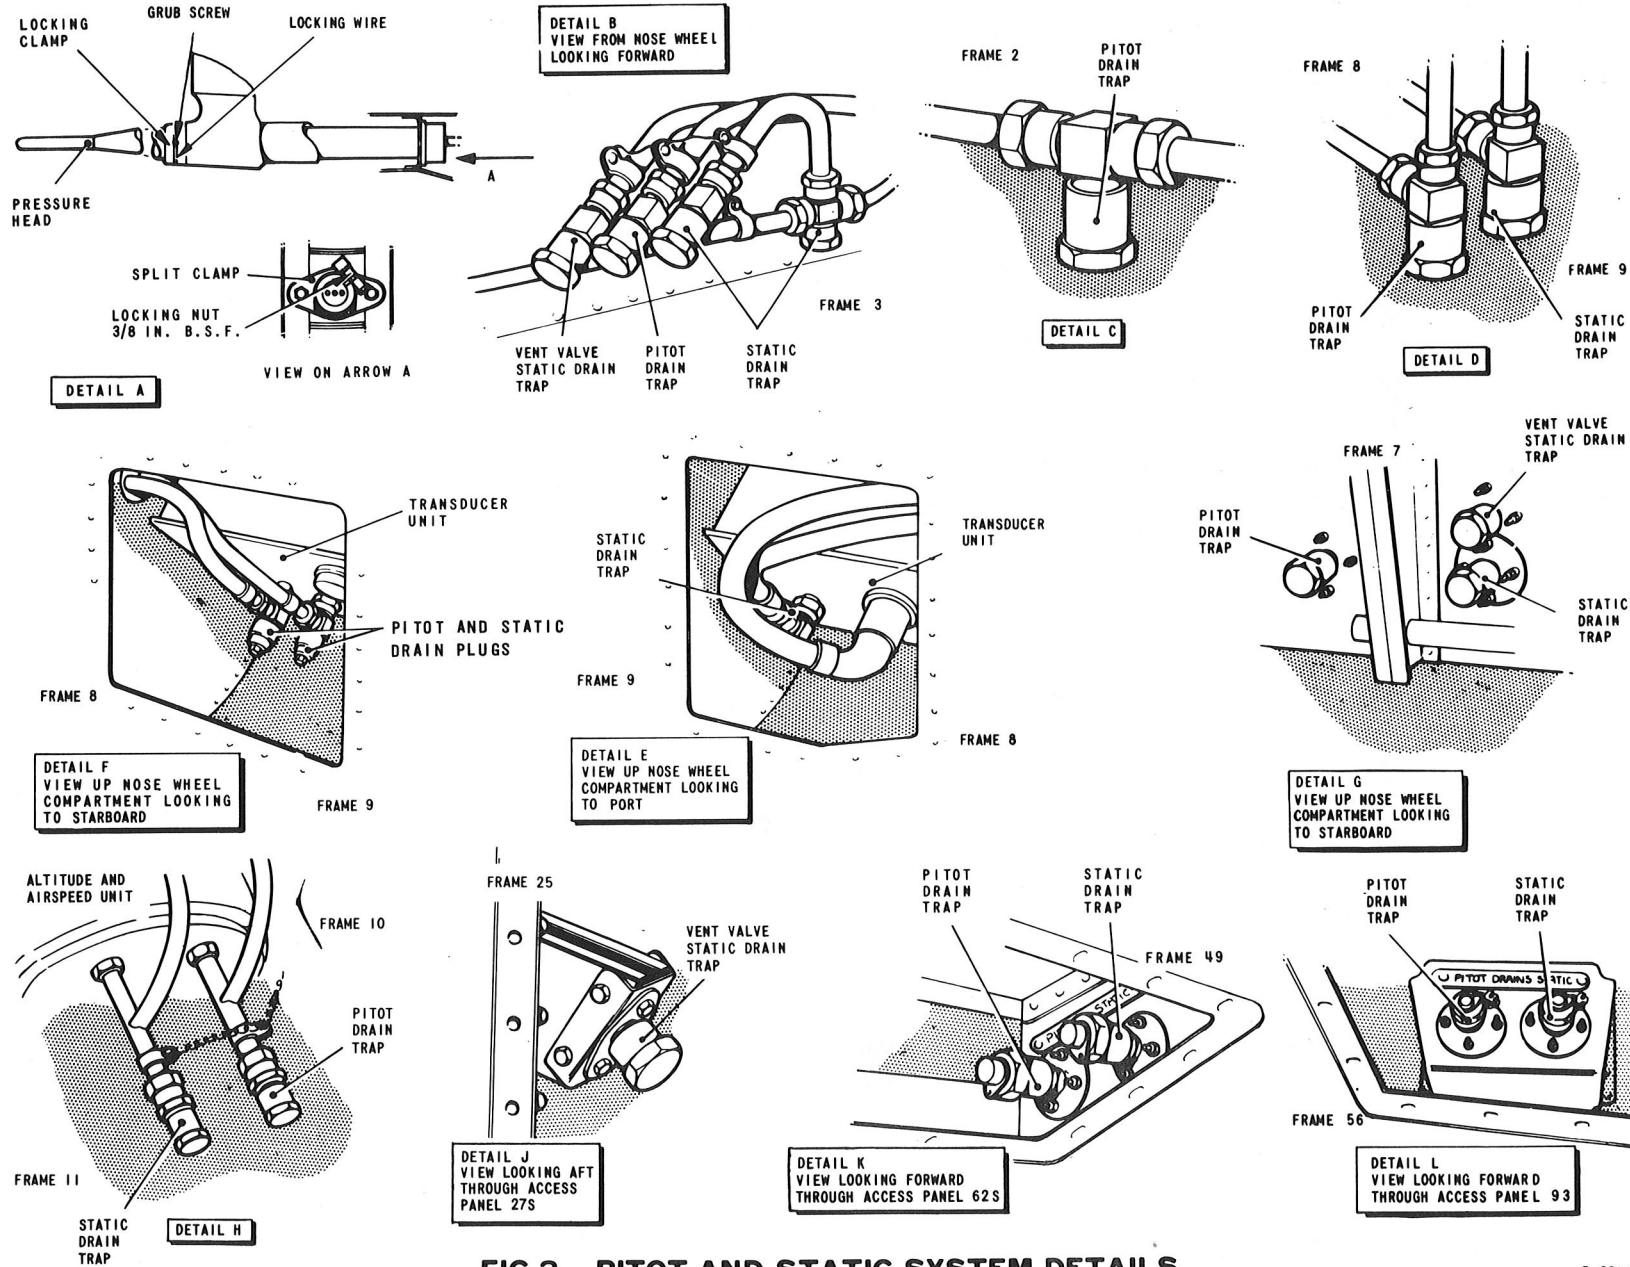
PITOT AND STATIC SYSTEM DETAILS
